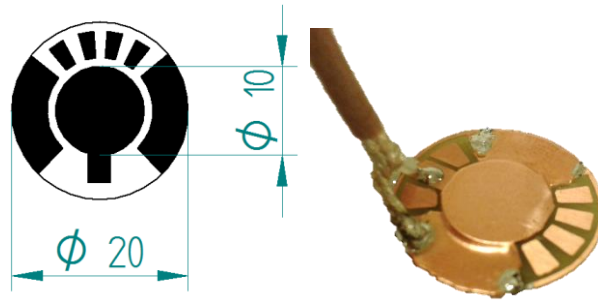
A PCB for connecting the piezo sensor. The PCB is etched using the footprint to the left.
